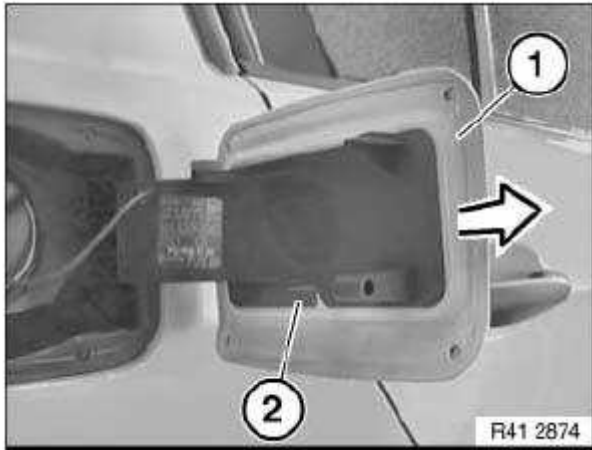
Removing Lever Out Lock And Fuel Filler Flap
